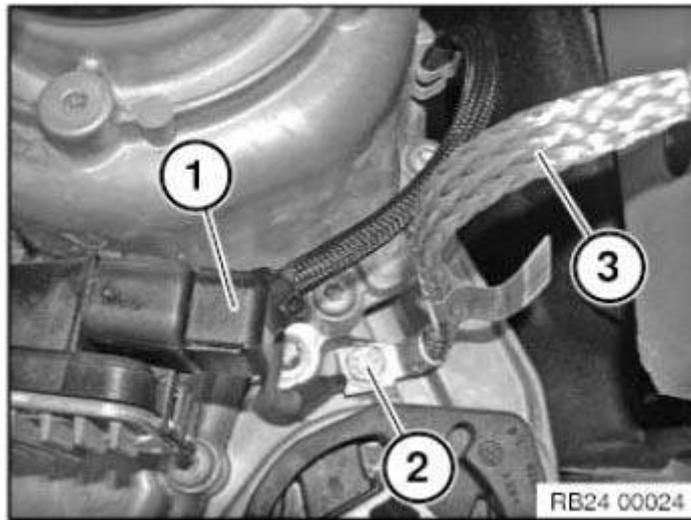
Identifying Transfer Box Control Unit Connector, Earth Strap And Screw
